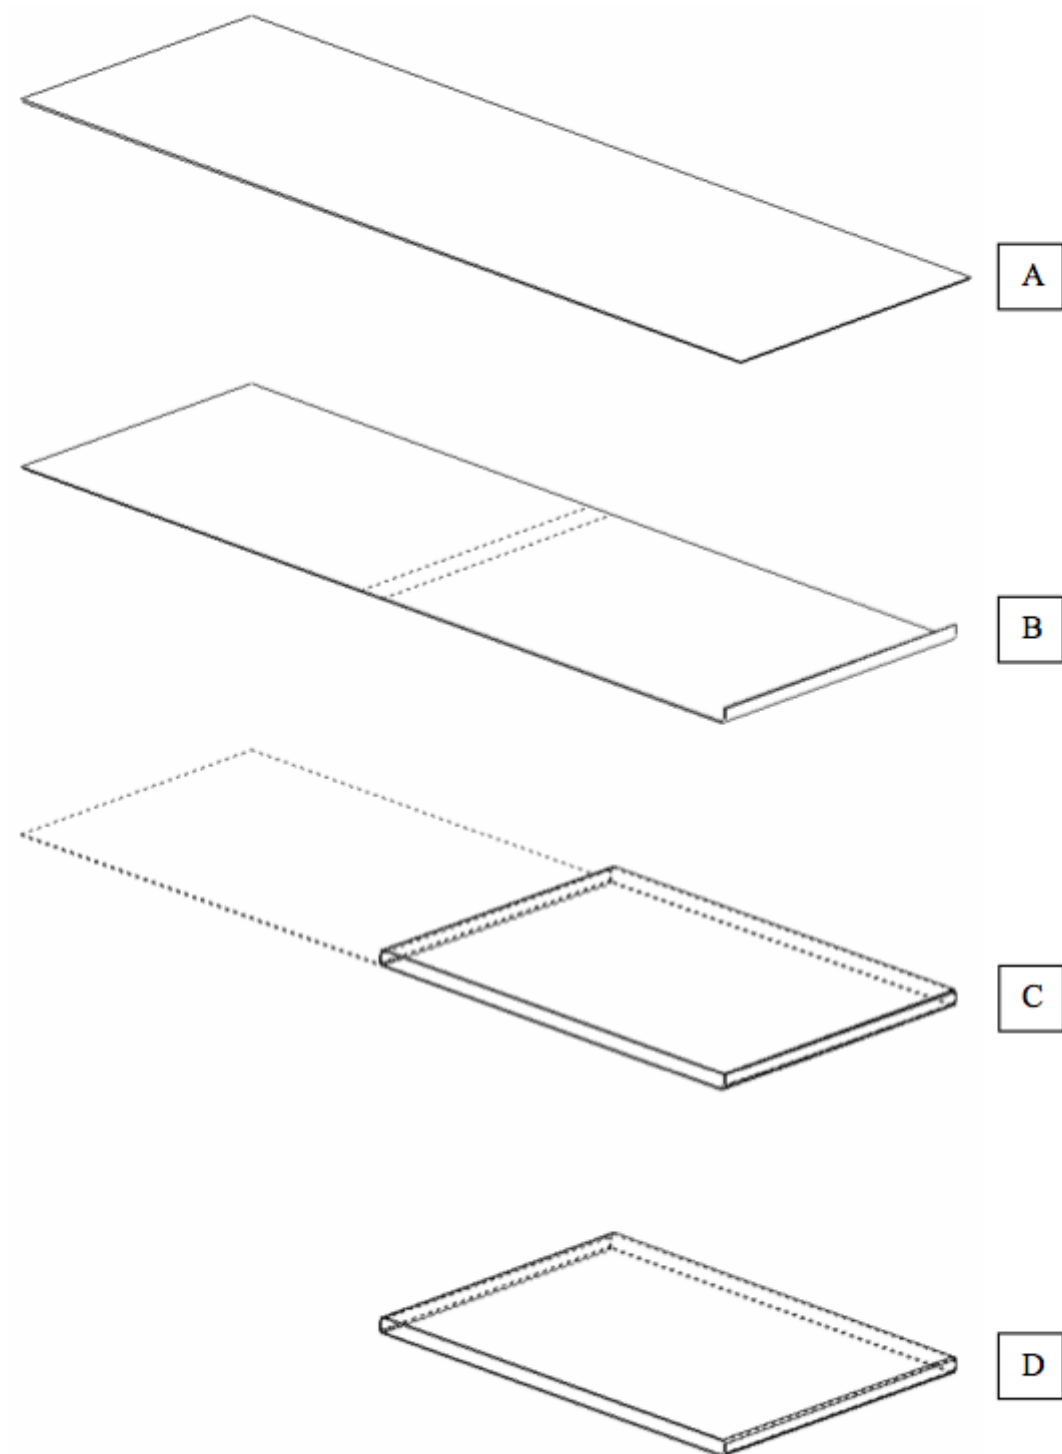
A strip of thin stainless steel sheet (A) is bent 90° at specified locations along its length (B) so that the opposite ends may be welded together (C) to form a narrow sleeve with open sides (D).
